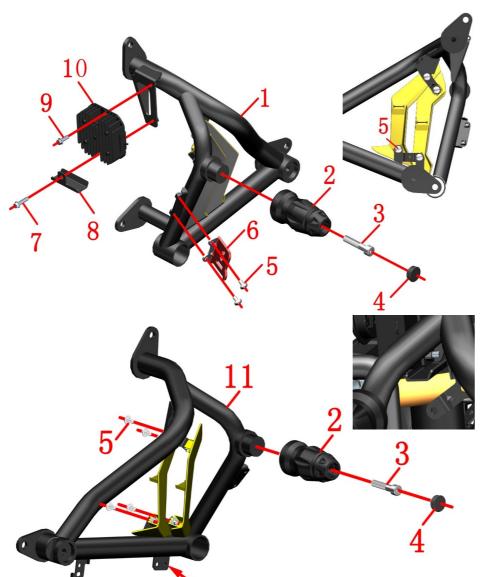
GUARD BAR COMPONENT		Guard bar assembly 3	CHK	40)
